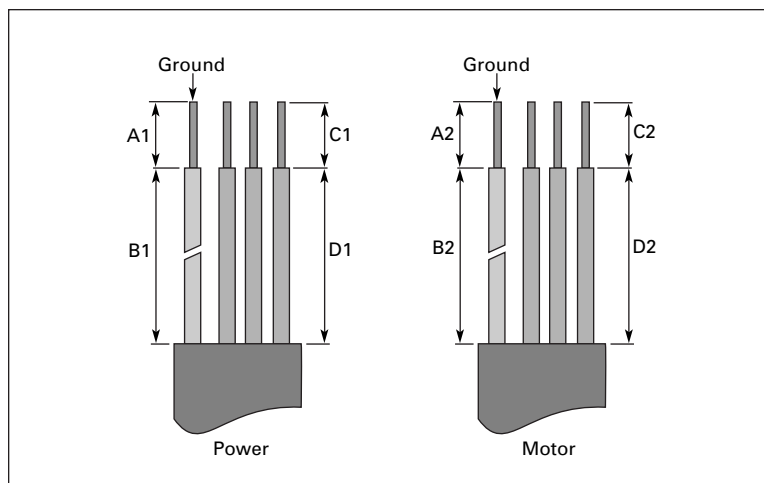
Input Power and Motor Cable Stripping and Wire Lengths
